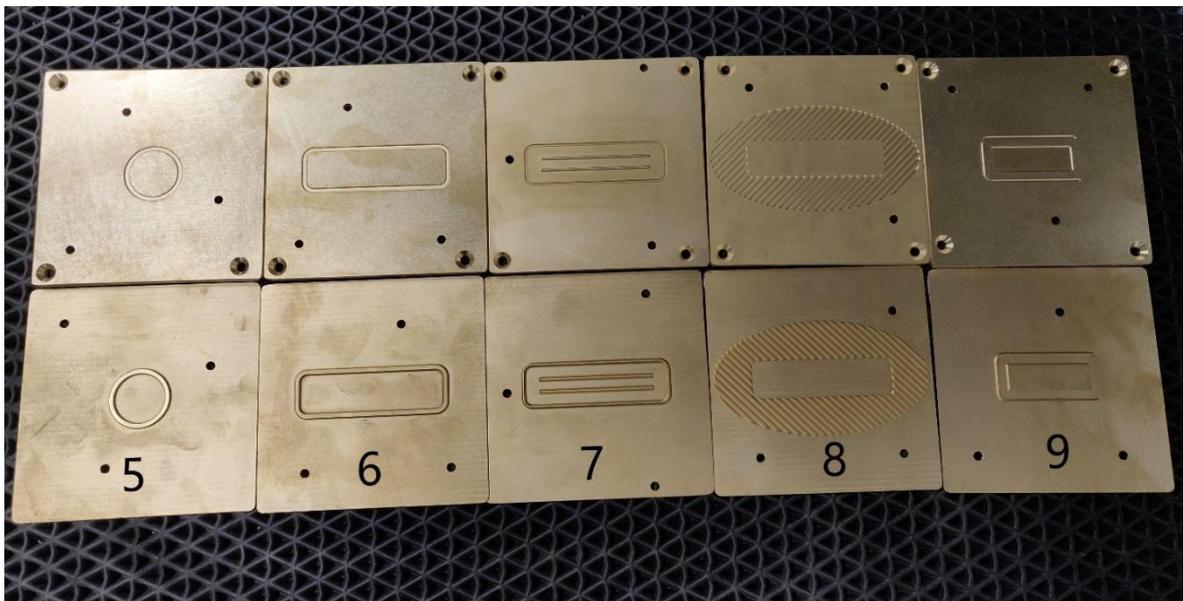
Manufactured brass embossing tools (toolsets 5–9).
